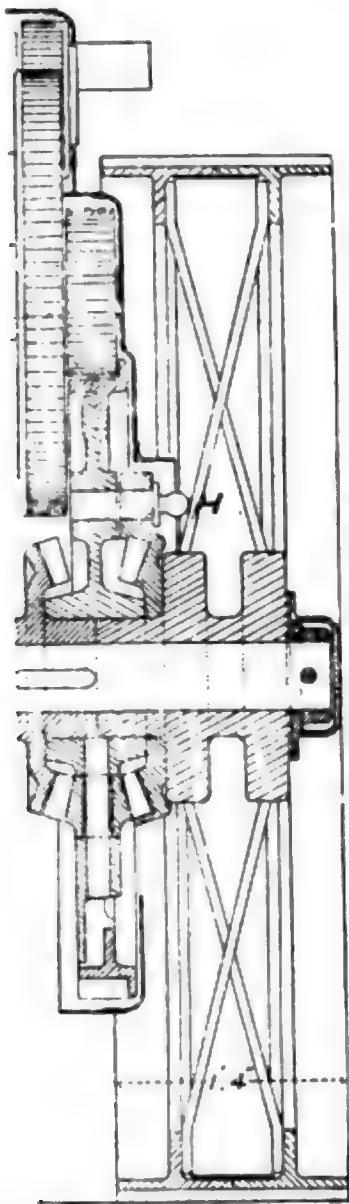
DIFFERENTIAL GEAR AND LOCKING PIN.
